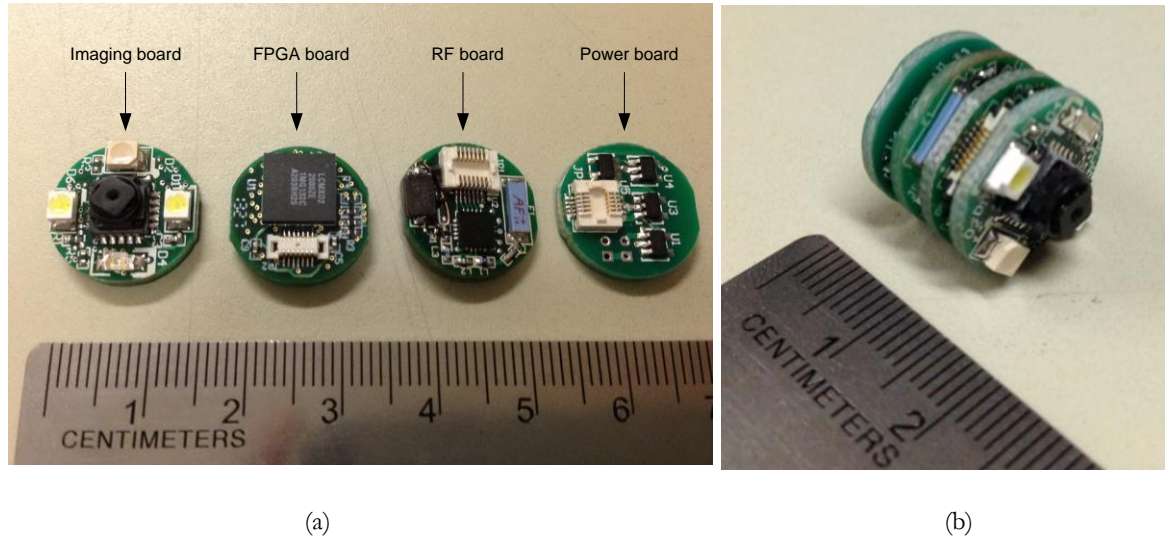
Photograph of (a) The generation-2 capsule PCBs; (b) PCB's stacked together;
